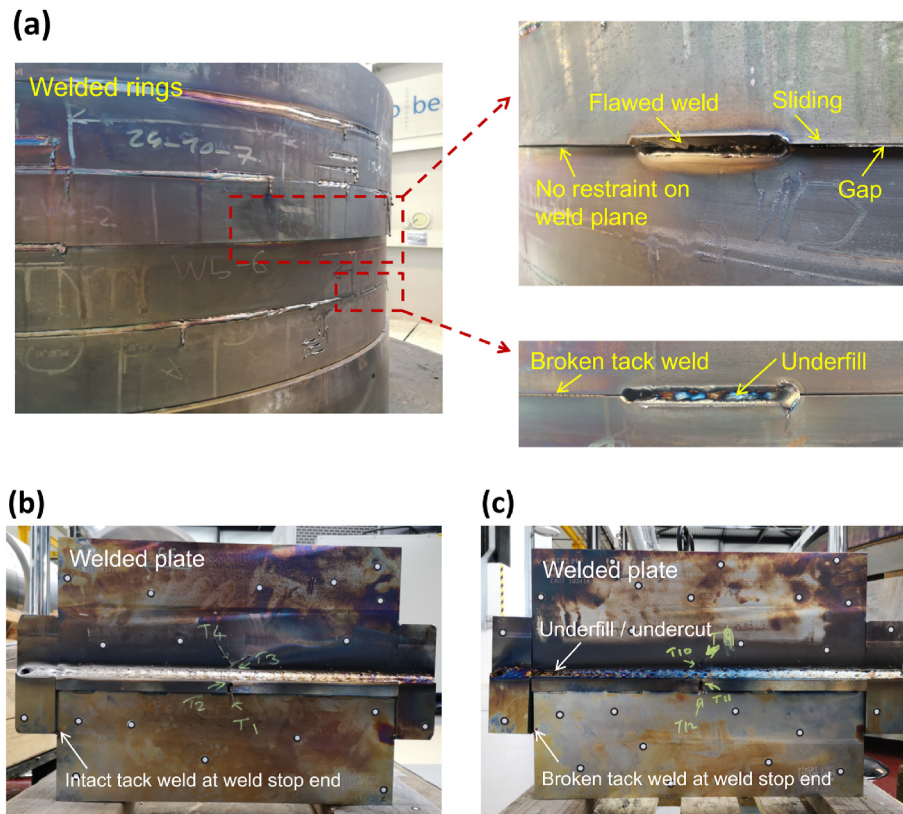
Weld defects observed in experimental trials of EB welding in steel rings when weld restraint is absent or lost (a). The weld quality for EB welding in steel plates with intact tack weld (b) and broken tack weld (c) is also compared [10].
